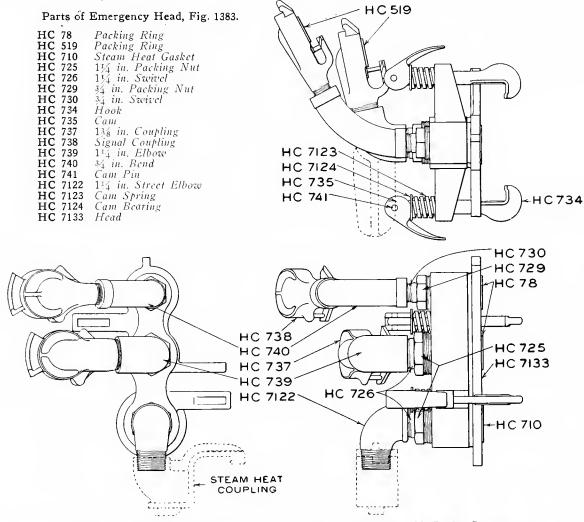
Emergency Head Back-Up Connection. New York Air Brake Company.
